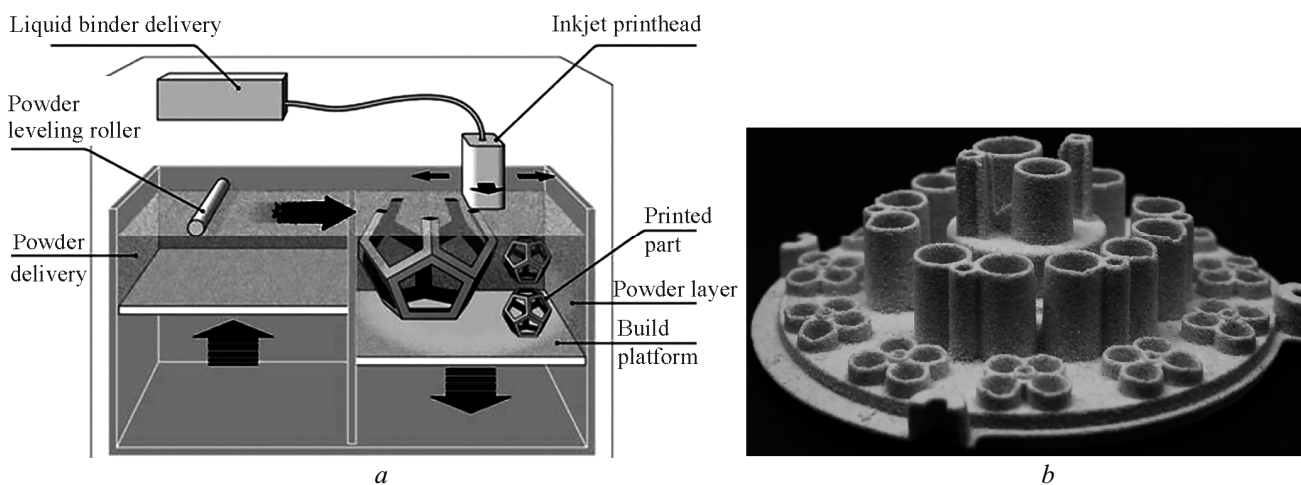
Binder jetting technique: *a*) general printing schematic [9], *b*) examples of ceramic parts produced with the Kwambio printer [8]
